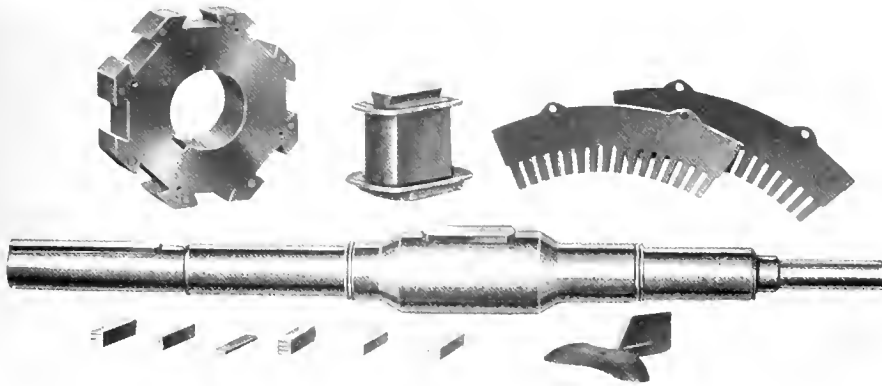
Rotor Shaft, Spider, Pole, and Stator Laminations
